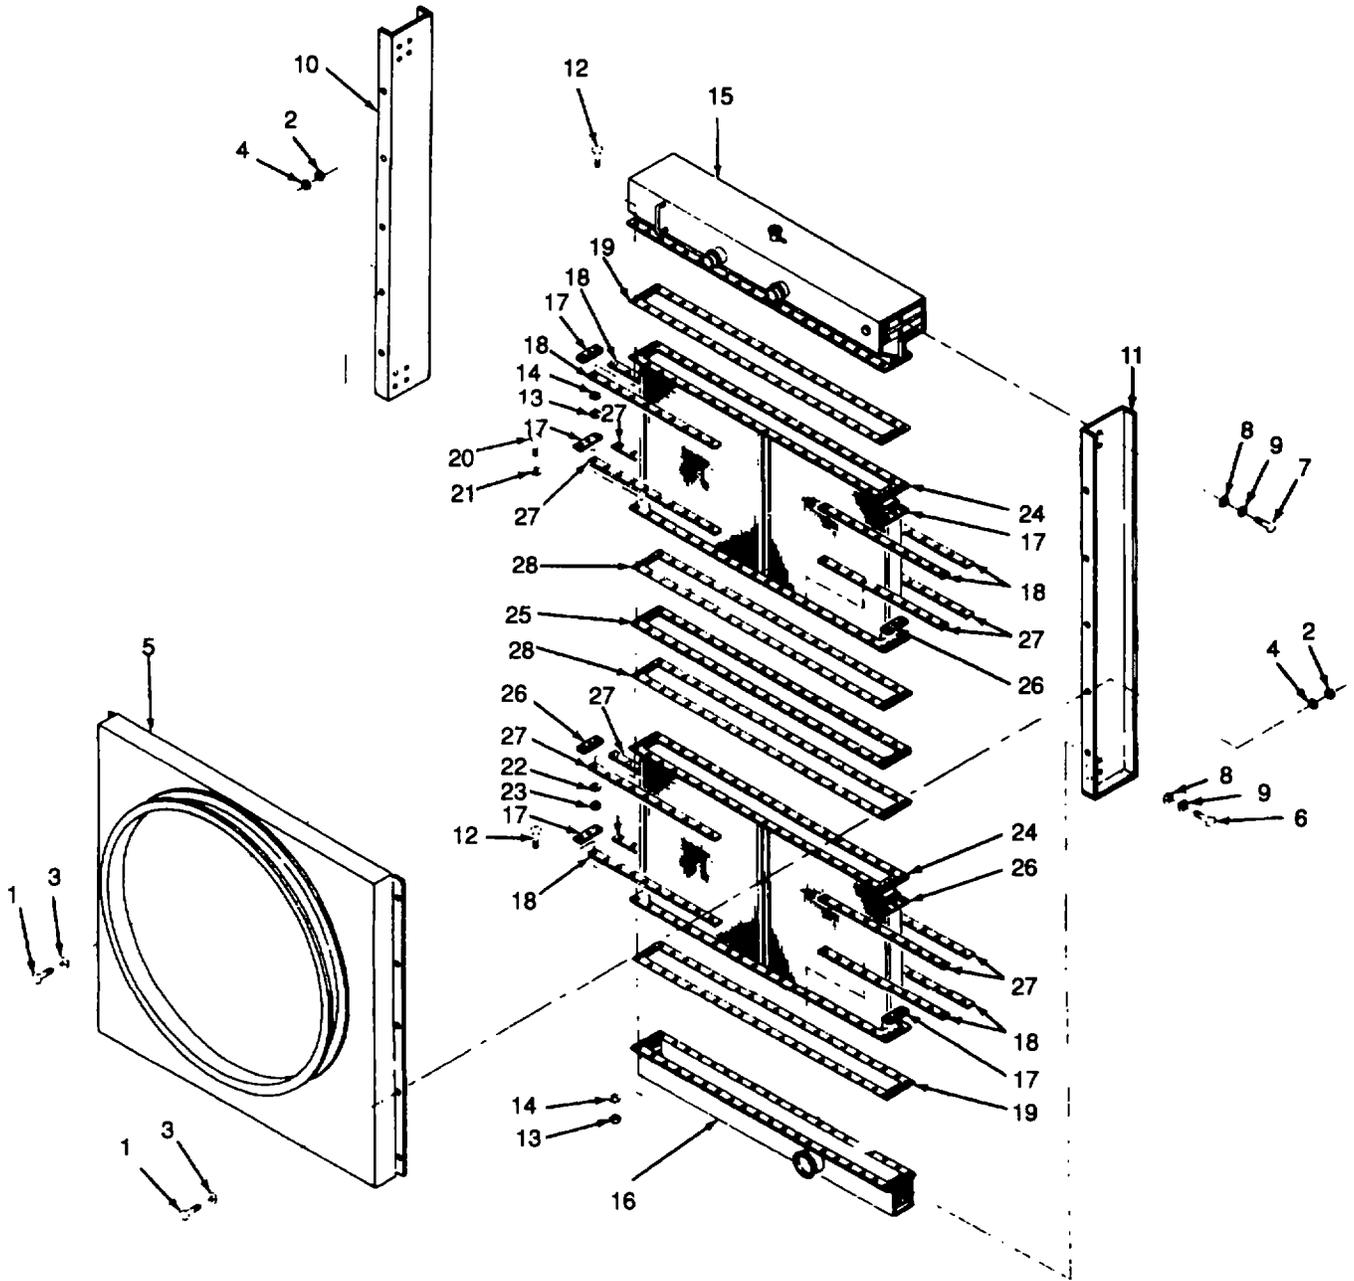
Radiator, Exploded View (Sheet 1 of 2)
